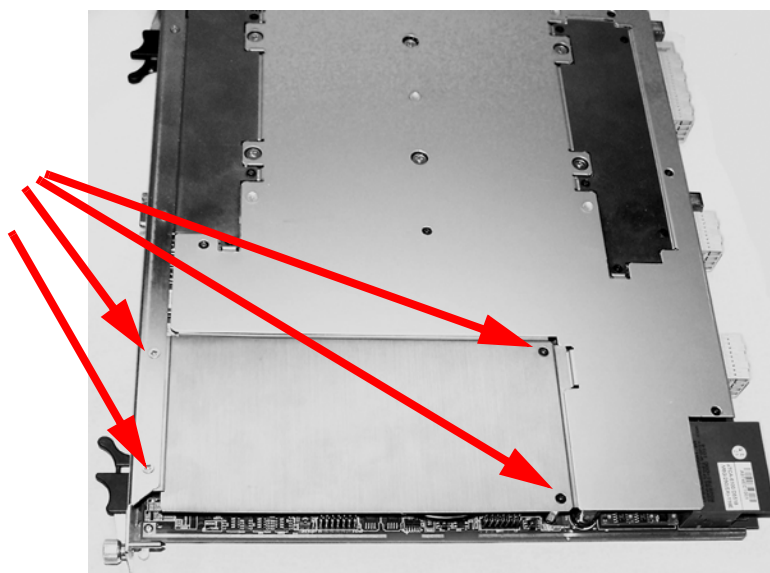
Remove the covers as indicated. Use a #1 Phillips screwdriver.
